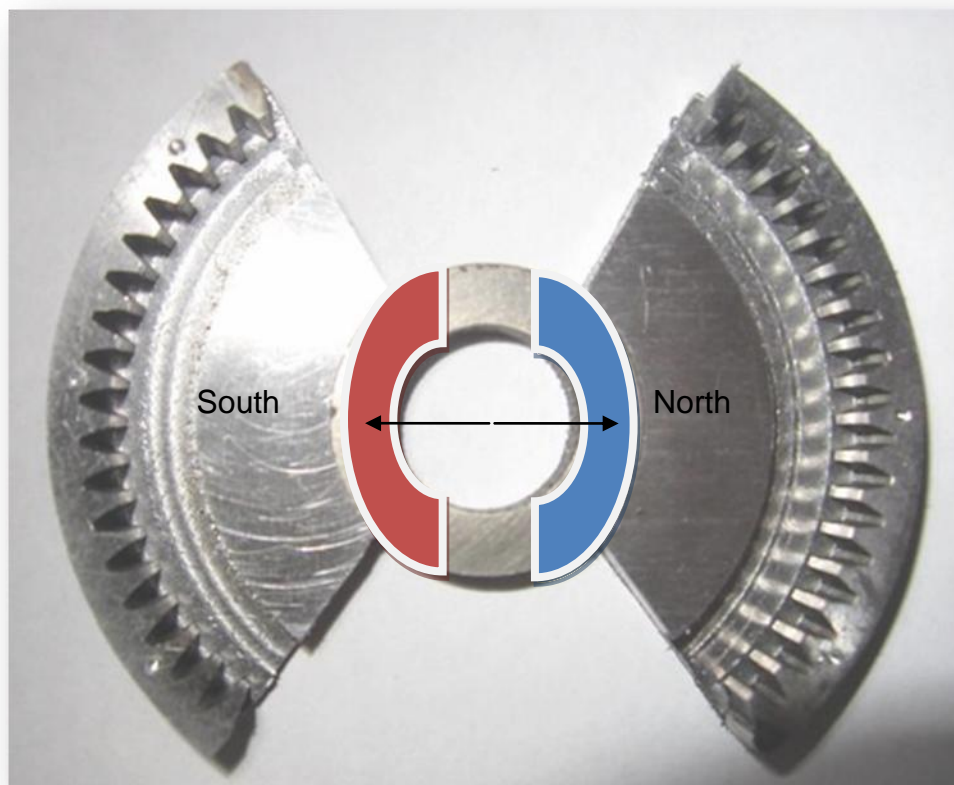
Diametrically Magnetized Neyo 35 Ring Magnet Prototype and two left and right Bottom Plates
